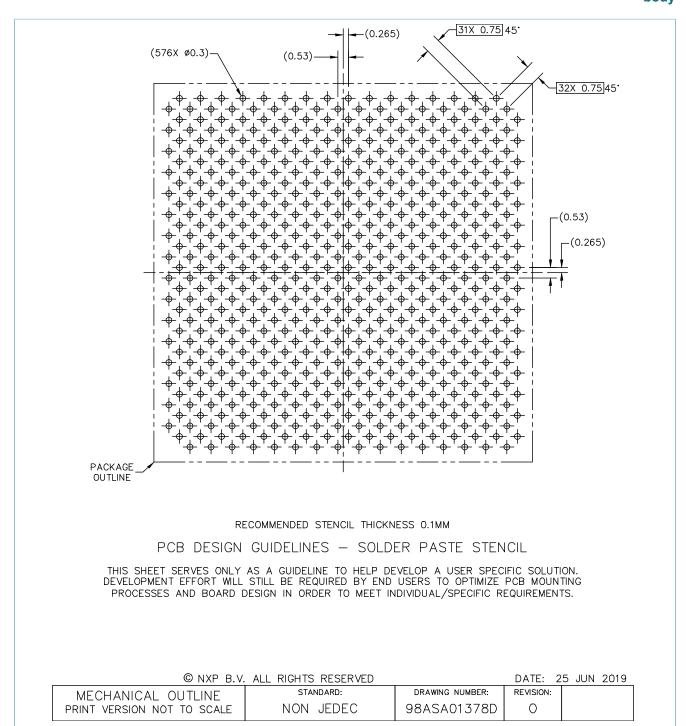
Reflow soldering footprint part3 of FBGA576 (SOT2031-1)
